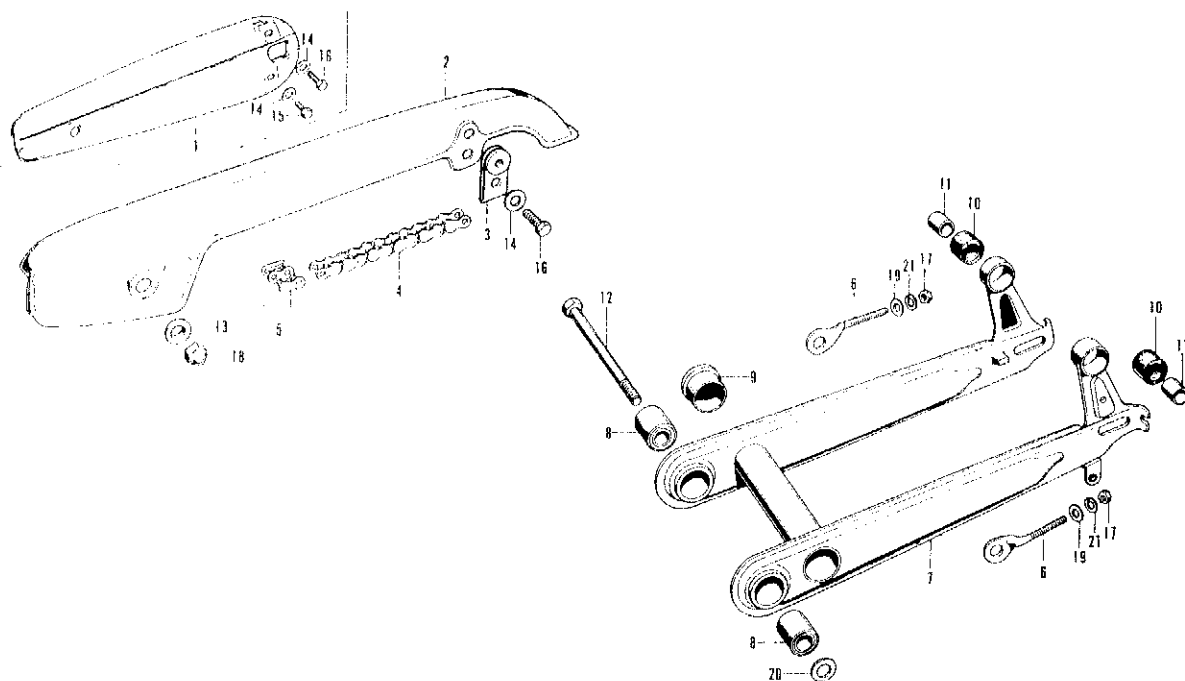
Chainguard and swinging arm - PC50K1 model
